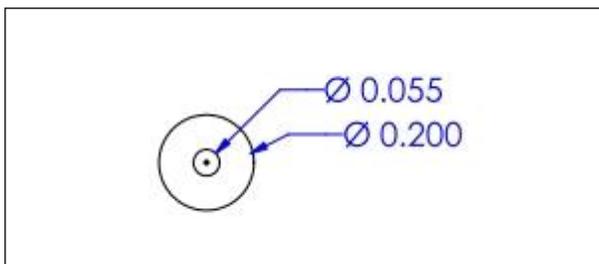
Construction drawing for the intermediate arbor washer. The thickness is .015"
